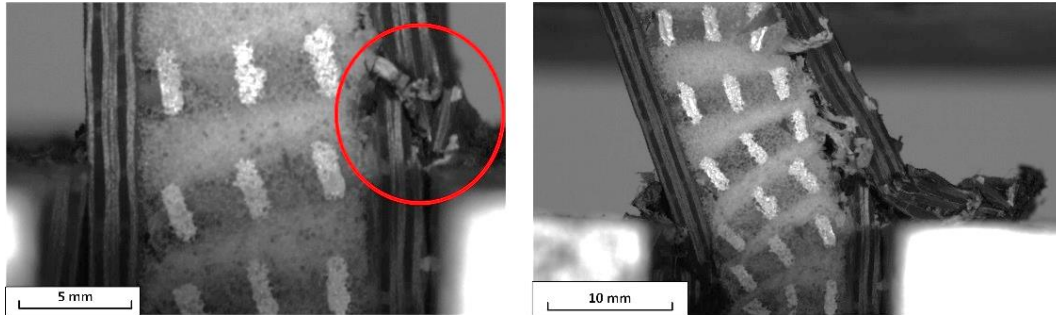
Left, Skin fracture and localised buckling at test fixture (highlighted). Right, Resulting bending failure of test coupon due to skin collapse. (Coupon A1).
